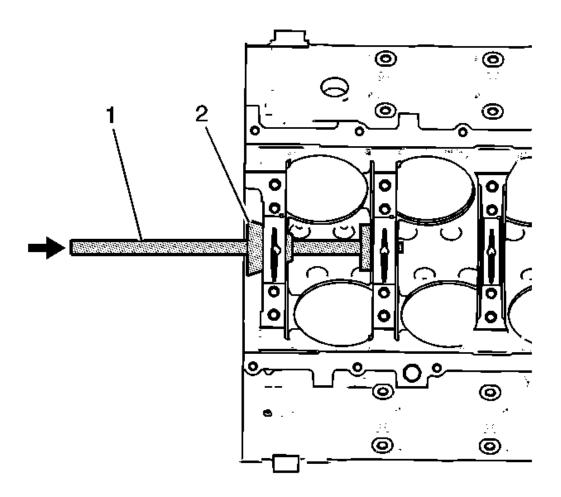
Driving Bearing Out Of Or Into Engine Block Courtesy of GENERAL MOTORS CORP.
